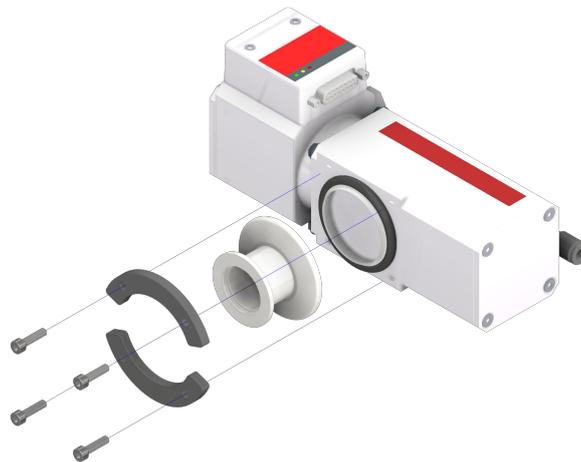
Mounting of the KF40-to-KF25-reducer to the HiPace® 10 Neo pump. Make sure the screws are tightened evenly and use only hand-tightening.
